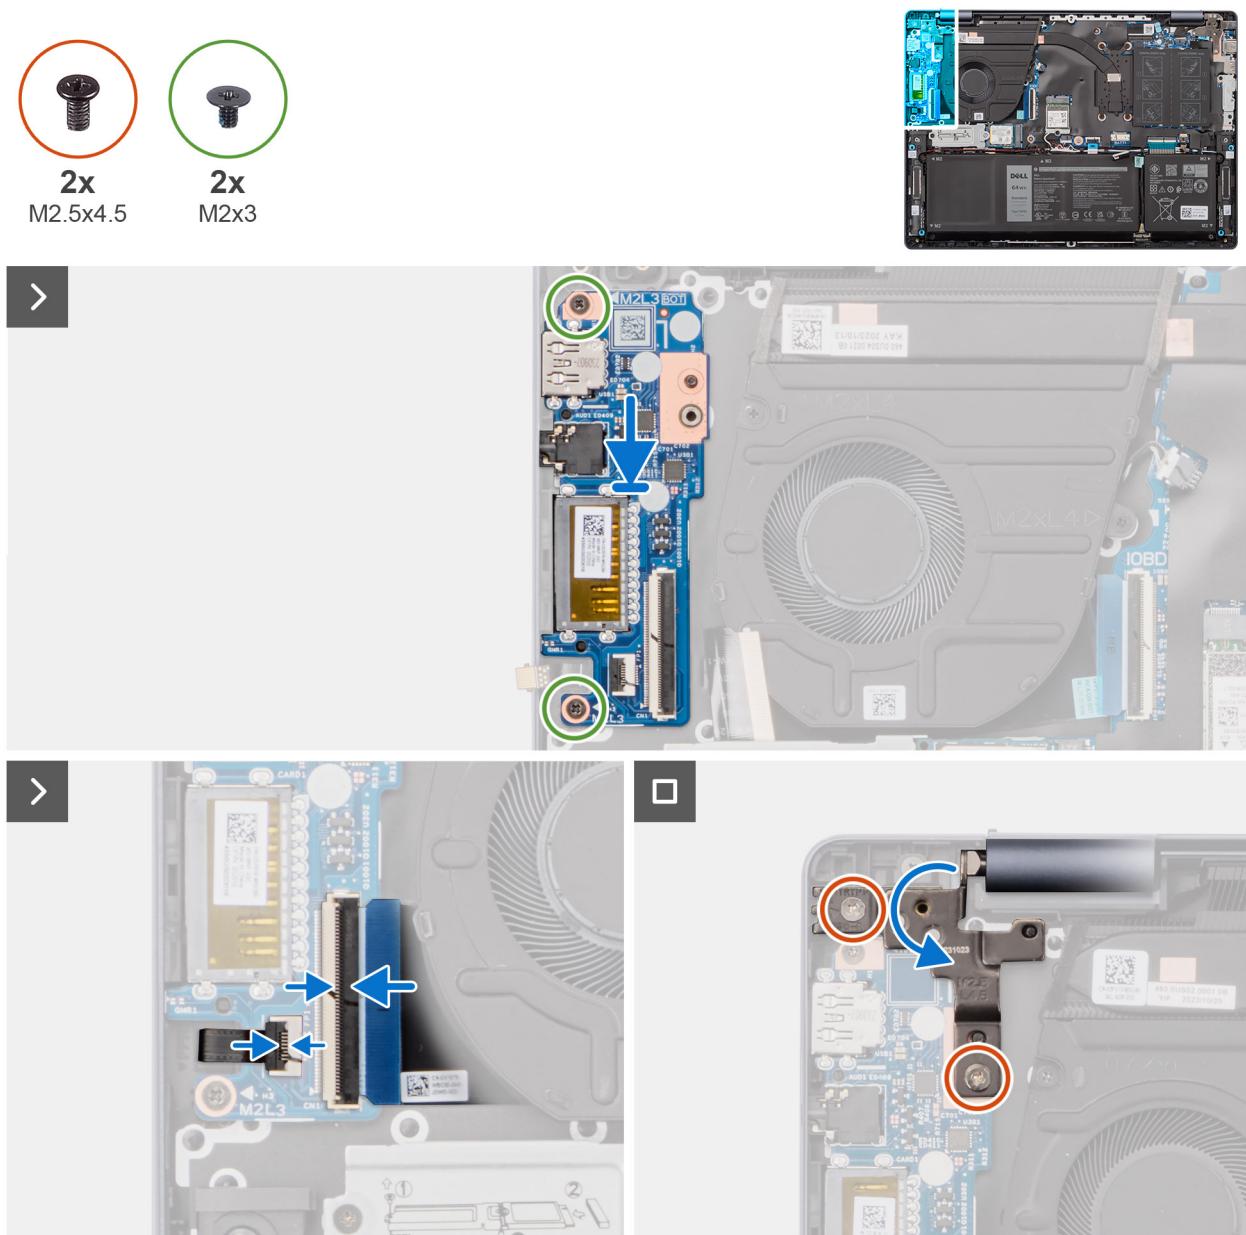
Installing the I/O board (for computers shipped with an aluminum chassis)
